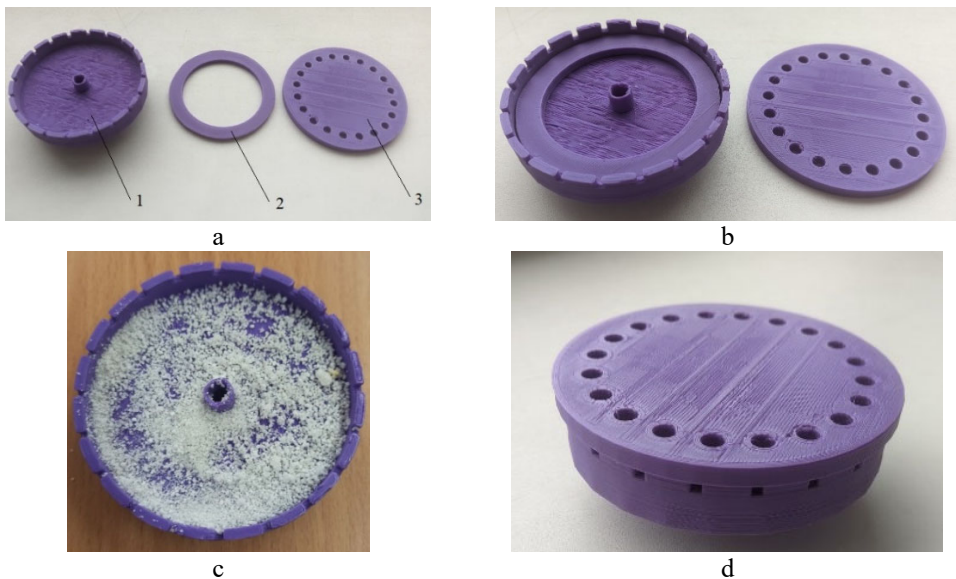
Components and design of the experimental sample of the burner: a – the structural elements of the burner; b – the assembly scheme of the burner; c – the working fluid (expanded perlite); d – the burner assembly.
